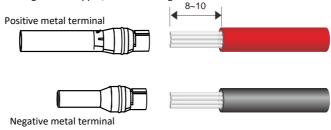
Stripping insulation from DC cables (unit : mm)
